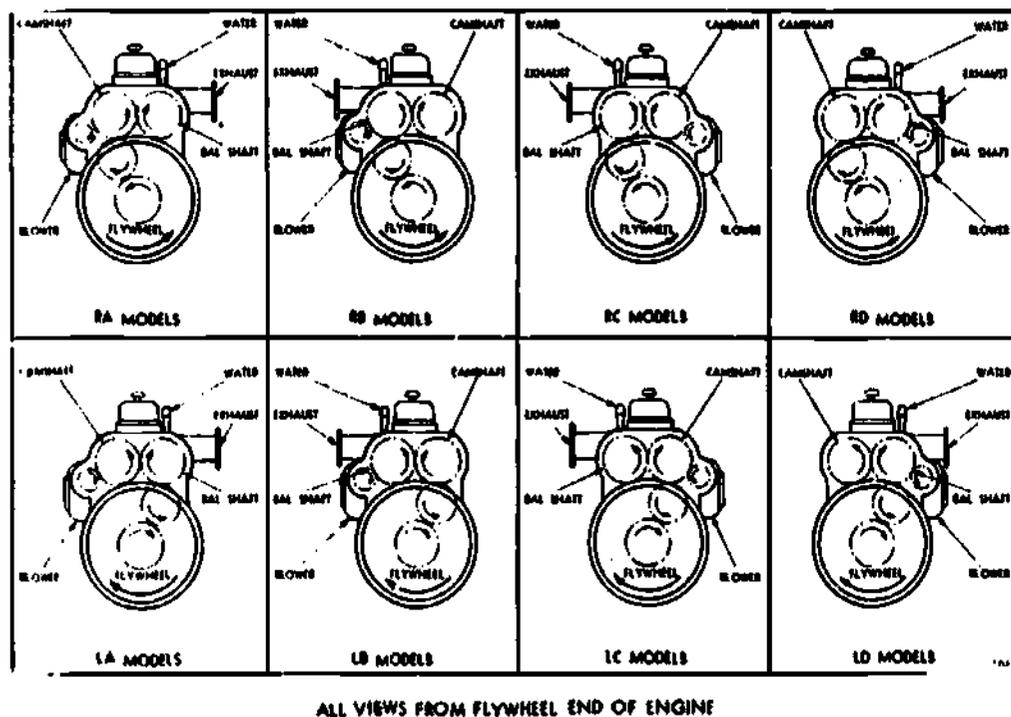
Rotation and accessory arrangements--3-, 4-, and 6-cylinder in-line engines.
